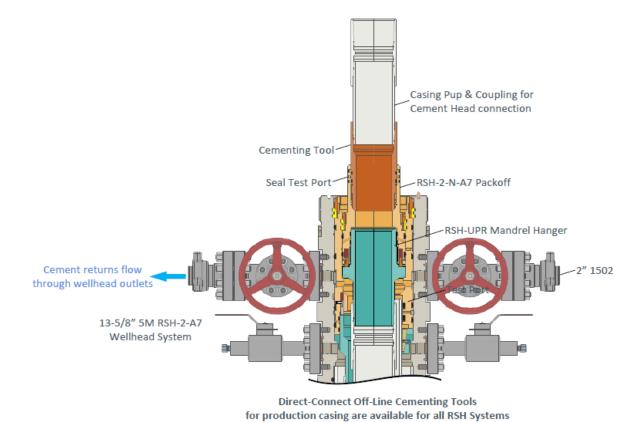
Vault 7" 5M offline cementing tool. Pressure rating limited by the lesser of 5M tool rating or the 7" pup joint and casing.
